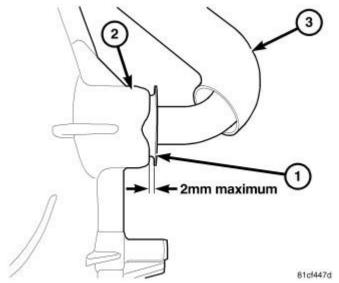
Cylinder Head, EGR solenoid/Valve, Flange Bolt, Tube, Gasket & Mounting Bolts Courtesy of CHRYSLER LLC
